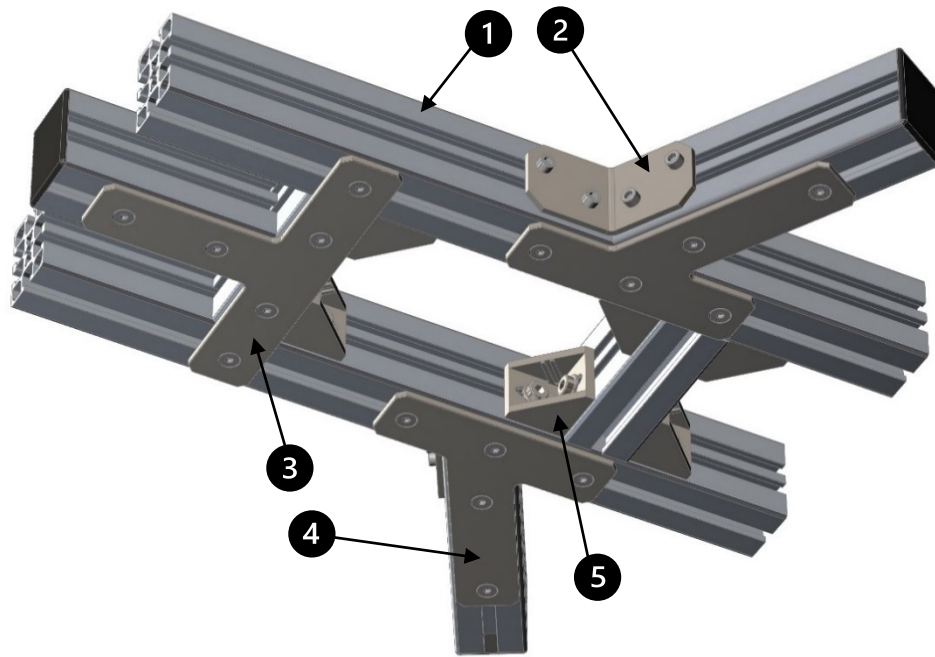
Stacking conveyor frame. (1) Aluminum profile. (2) Angle bracket. (3) Front holder bracket. (4) Side holder bracket. (5) Angle mount.
